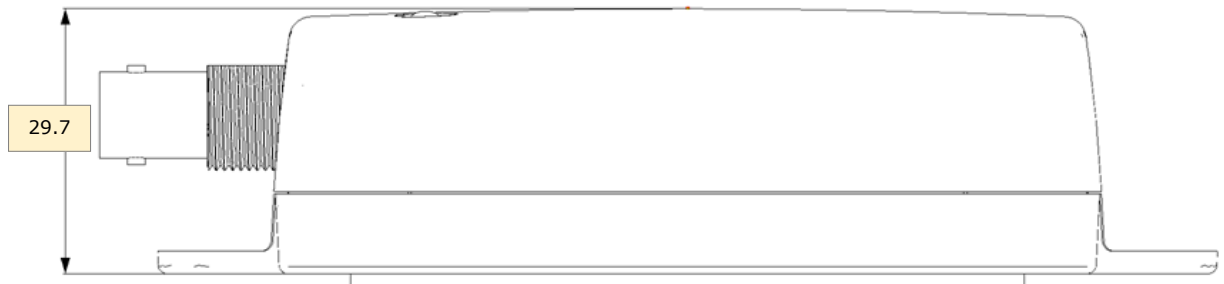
LDSBus pH Sensor Adapter Dimension – Side View
